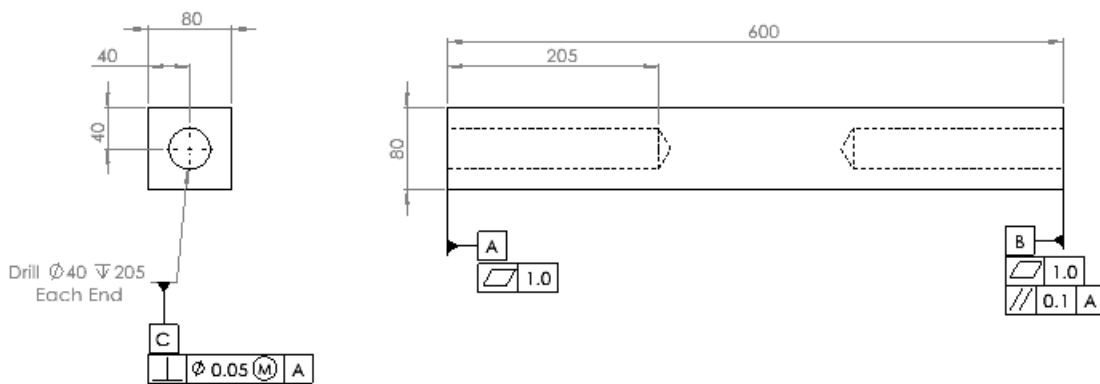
Cross-sectional and end-view drawings of the composite portion of the DEI specimens as designed (dimensions in millimeters)
